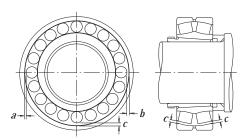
Measuring Clearance in Large Spherical Roller Bearing
